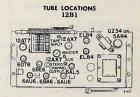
Top View of 12B1 Chassis, Tube Locations Shown.
